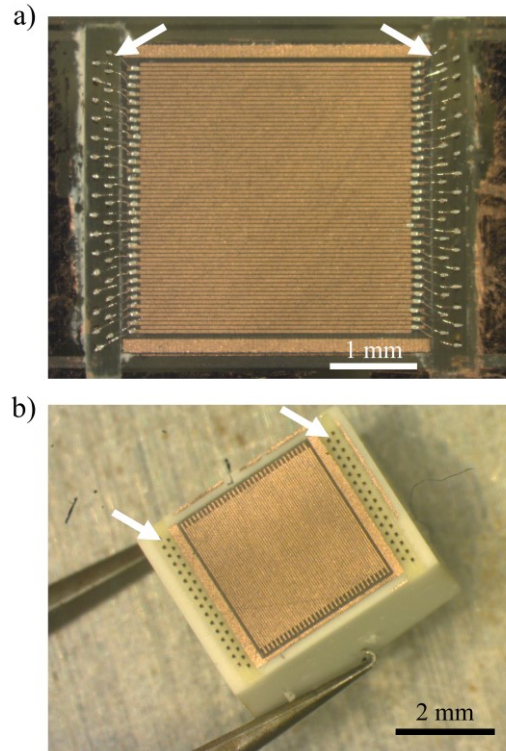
Photo of a) the backside of the array with the wire bonds between the array and strips of flexible circuit board completed and b) the array and backing layer stack showing the front face of the array with the strips of flexible circuit board accessible. The strips of flex are highlighted with arrows.
